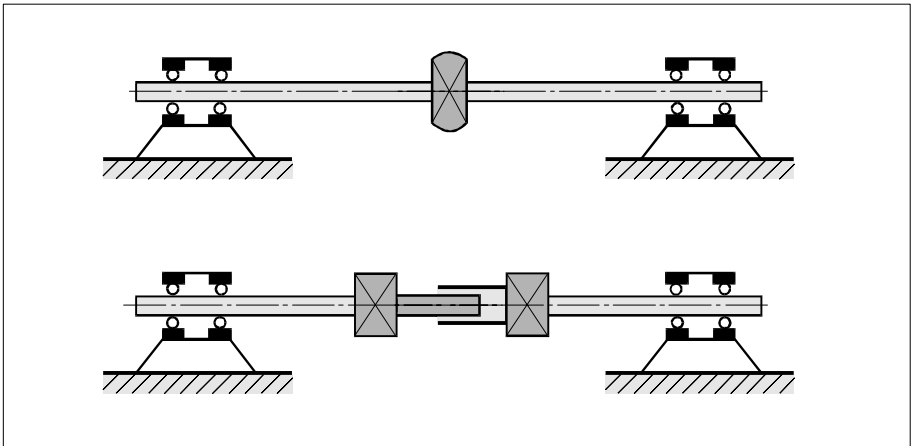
Axial offset with compensating element, double joint coupling above, joint shaft below
